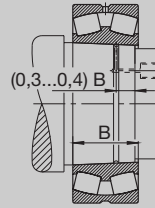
Dismounting of Tapered Shaft by using Hydraulic Pressure
